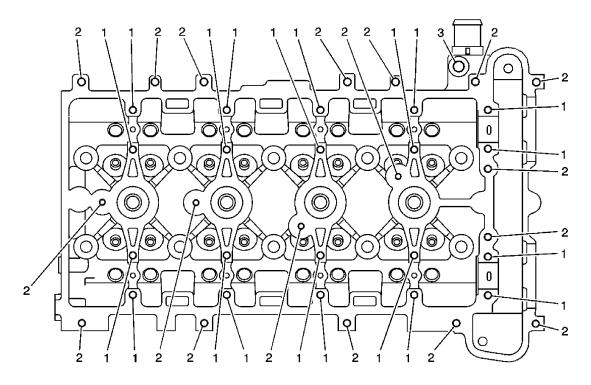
Identifying Bolt Size & Locations On Lower Crankcase - Right Courtesy of GENERAL MOTORS CORP.
